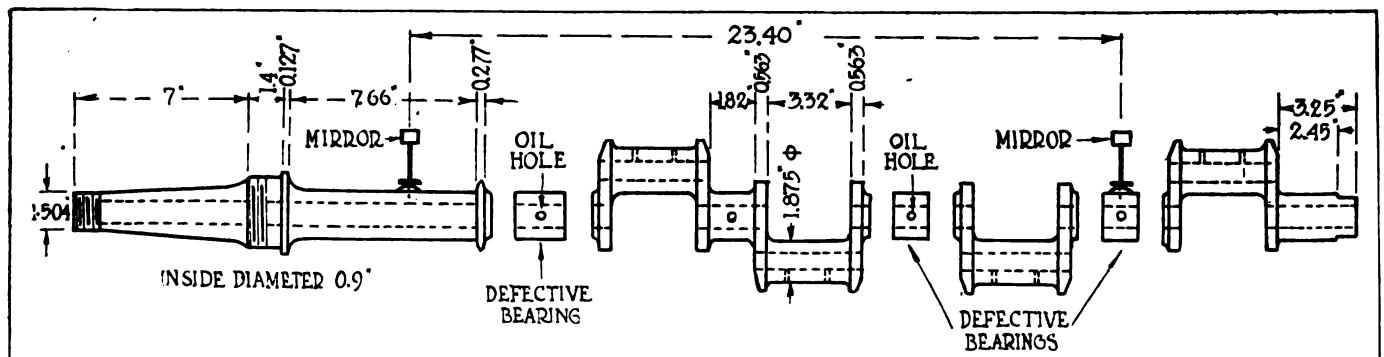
Sketch of crankshaft, showing location of defective bearings
